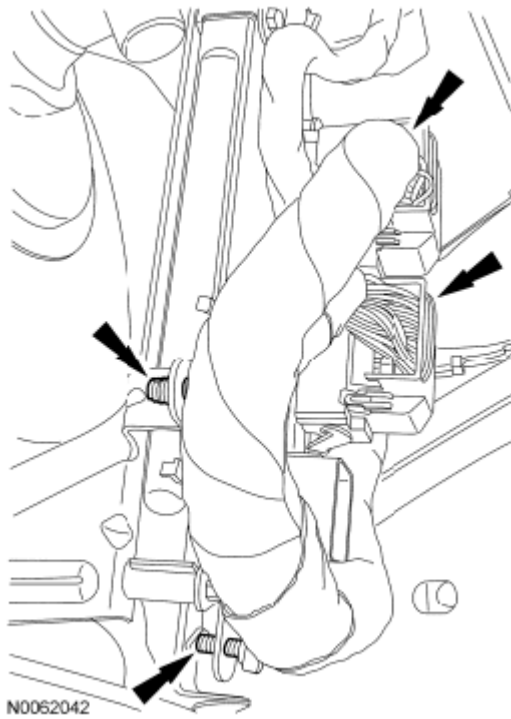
Locating PCM Electrical Connectors & Pin-Type Retainers
